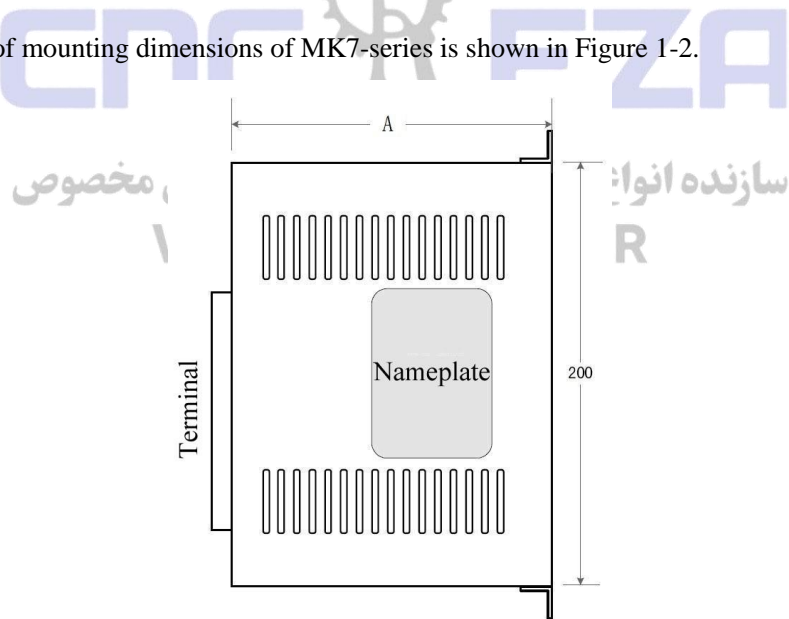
Side View of Mounting Dimensions of MK7-Series
